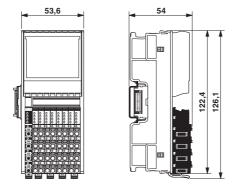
Nominal dimensions of the F housing with one terminal field (type 1F, e.g., AXL F Al8 XC 2H, AXL F DI32/1 2H)
